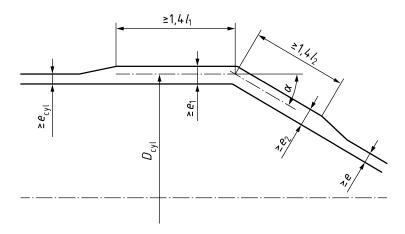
Geometry of cone/cylinder intersection without knuckle - Large end
